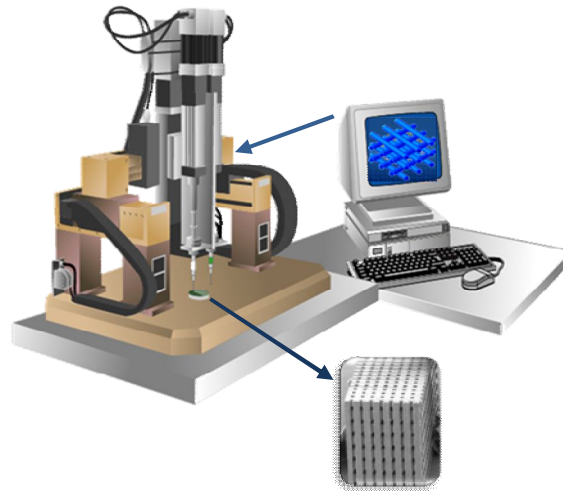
The schematic illustration of the robocasting fabrication technique.
